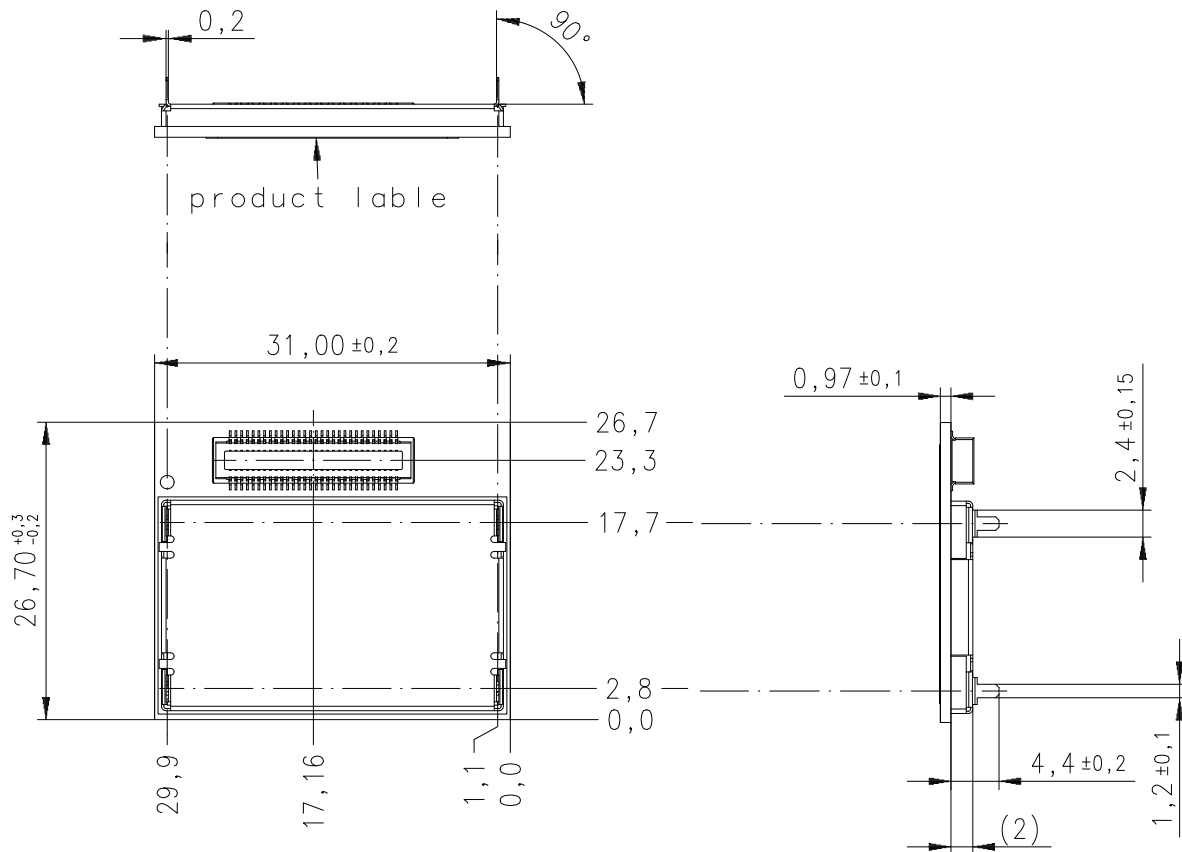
Mechanical dimensions of BG2-E/BG2-W (all dimensions in millimeters)
